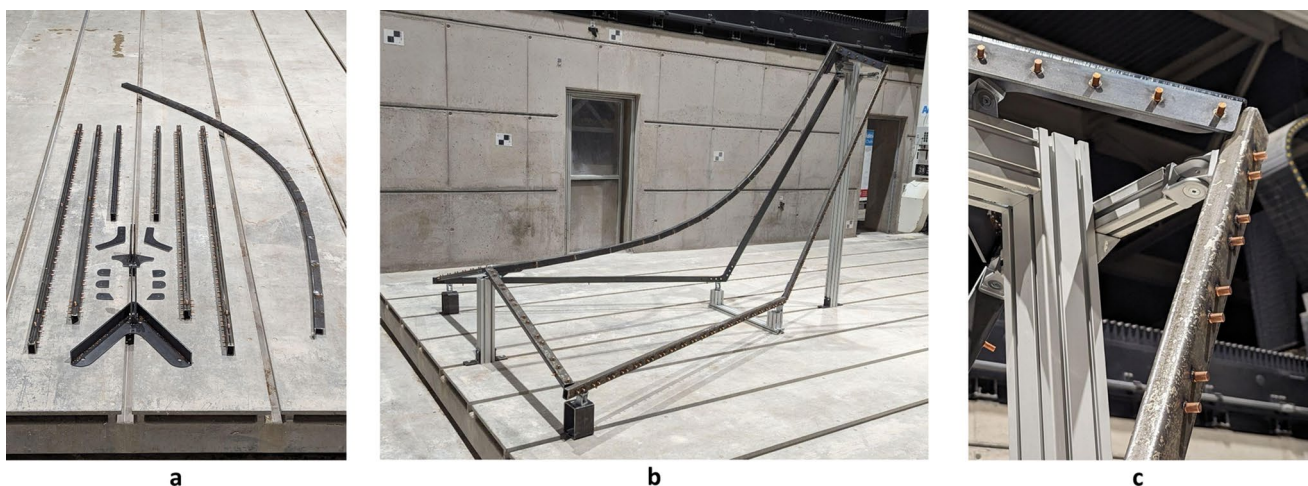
a Individual frame parts illustrate design for disassembly; b Frame assembled on auxiliary T-slot framing; c Detailed view of assembly featuring stud welded pins
